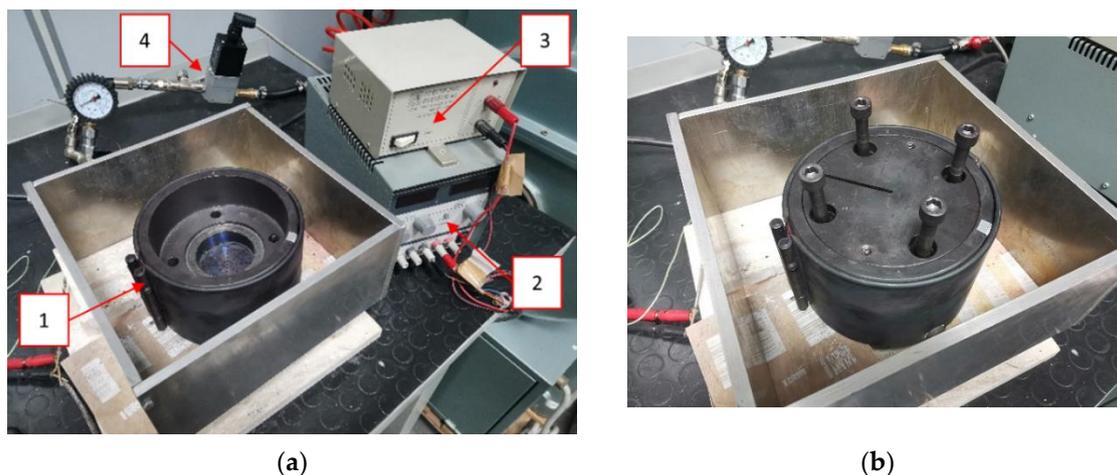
Free-forming equipment: (a) Constituent elements: die (1), voltage generator (2), stabilizer (3), solenoid valve (4); (b) closed die.
